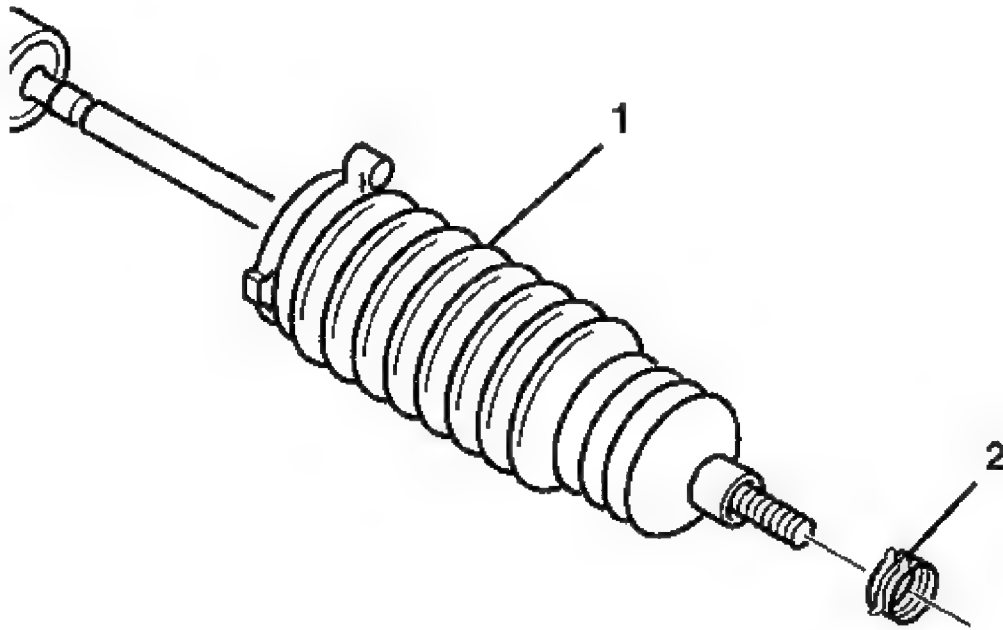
View Of Tie Rod End Clamp, Rack & Pinion Boot
